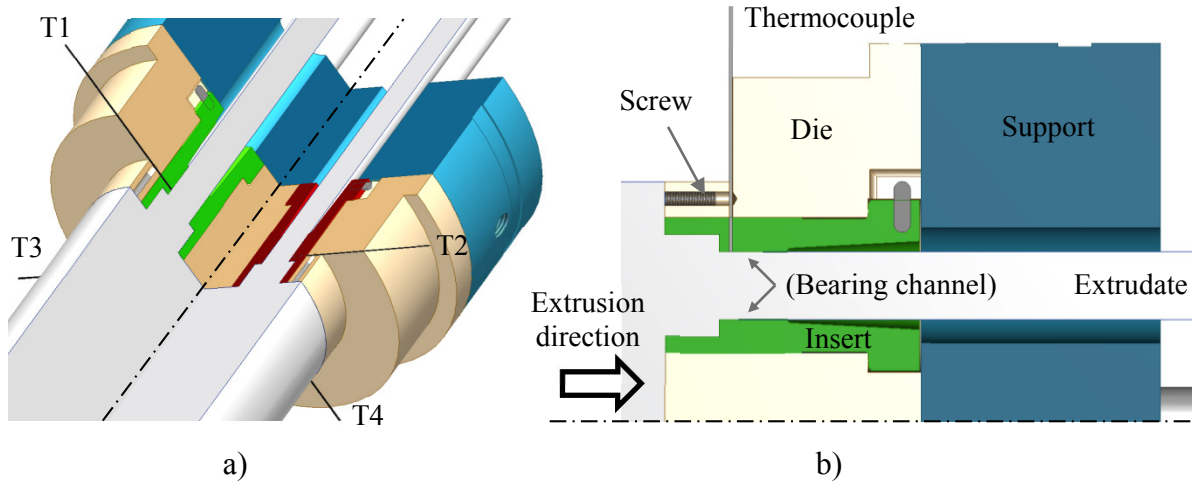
Thermocouple in multi-hole die. a) Thermocouple arrangement in the multi-hole die, b) thermocouple position in the extrusion insert.
